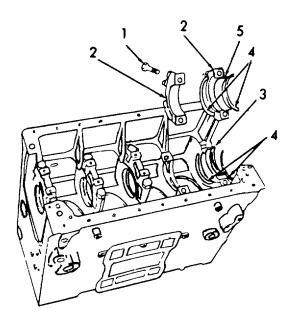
Main Bearing Shells, Bearing Caps, and Crankshaft Thrust Washers, Removal/Installation.
